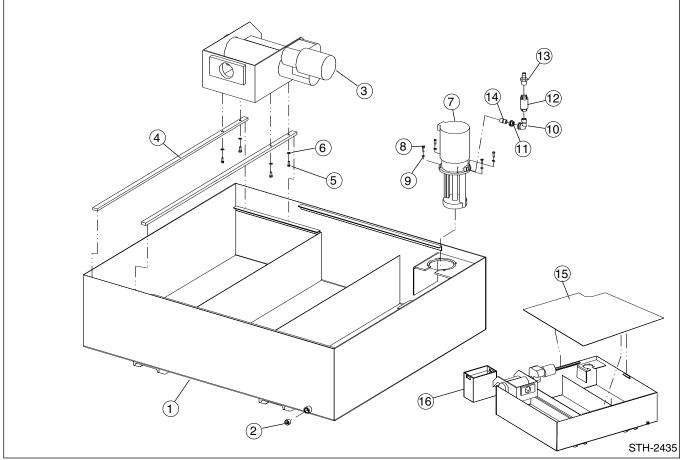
FIGURE O - COOLANT TANK ASSEMBLY, 500L SKID TYPE
